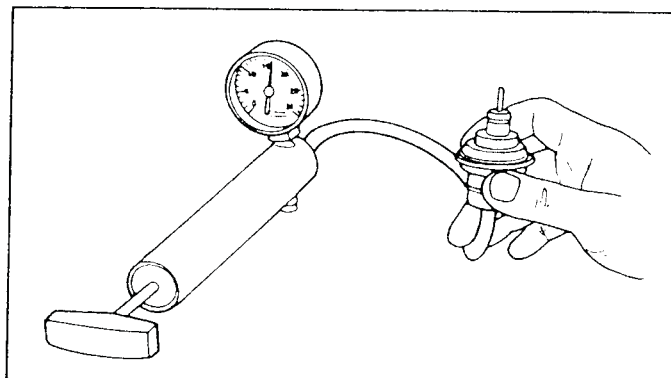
Testing Transmission Vacuum Unit for Leakage
